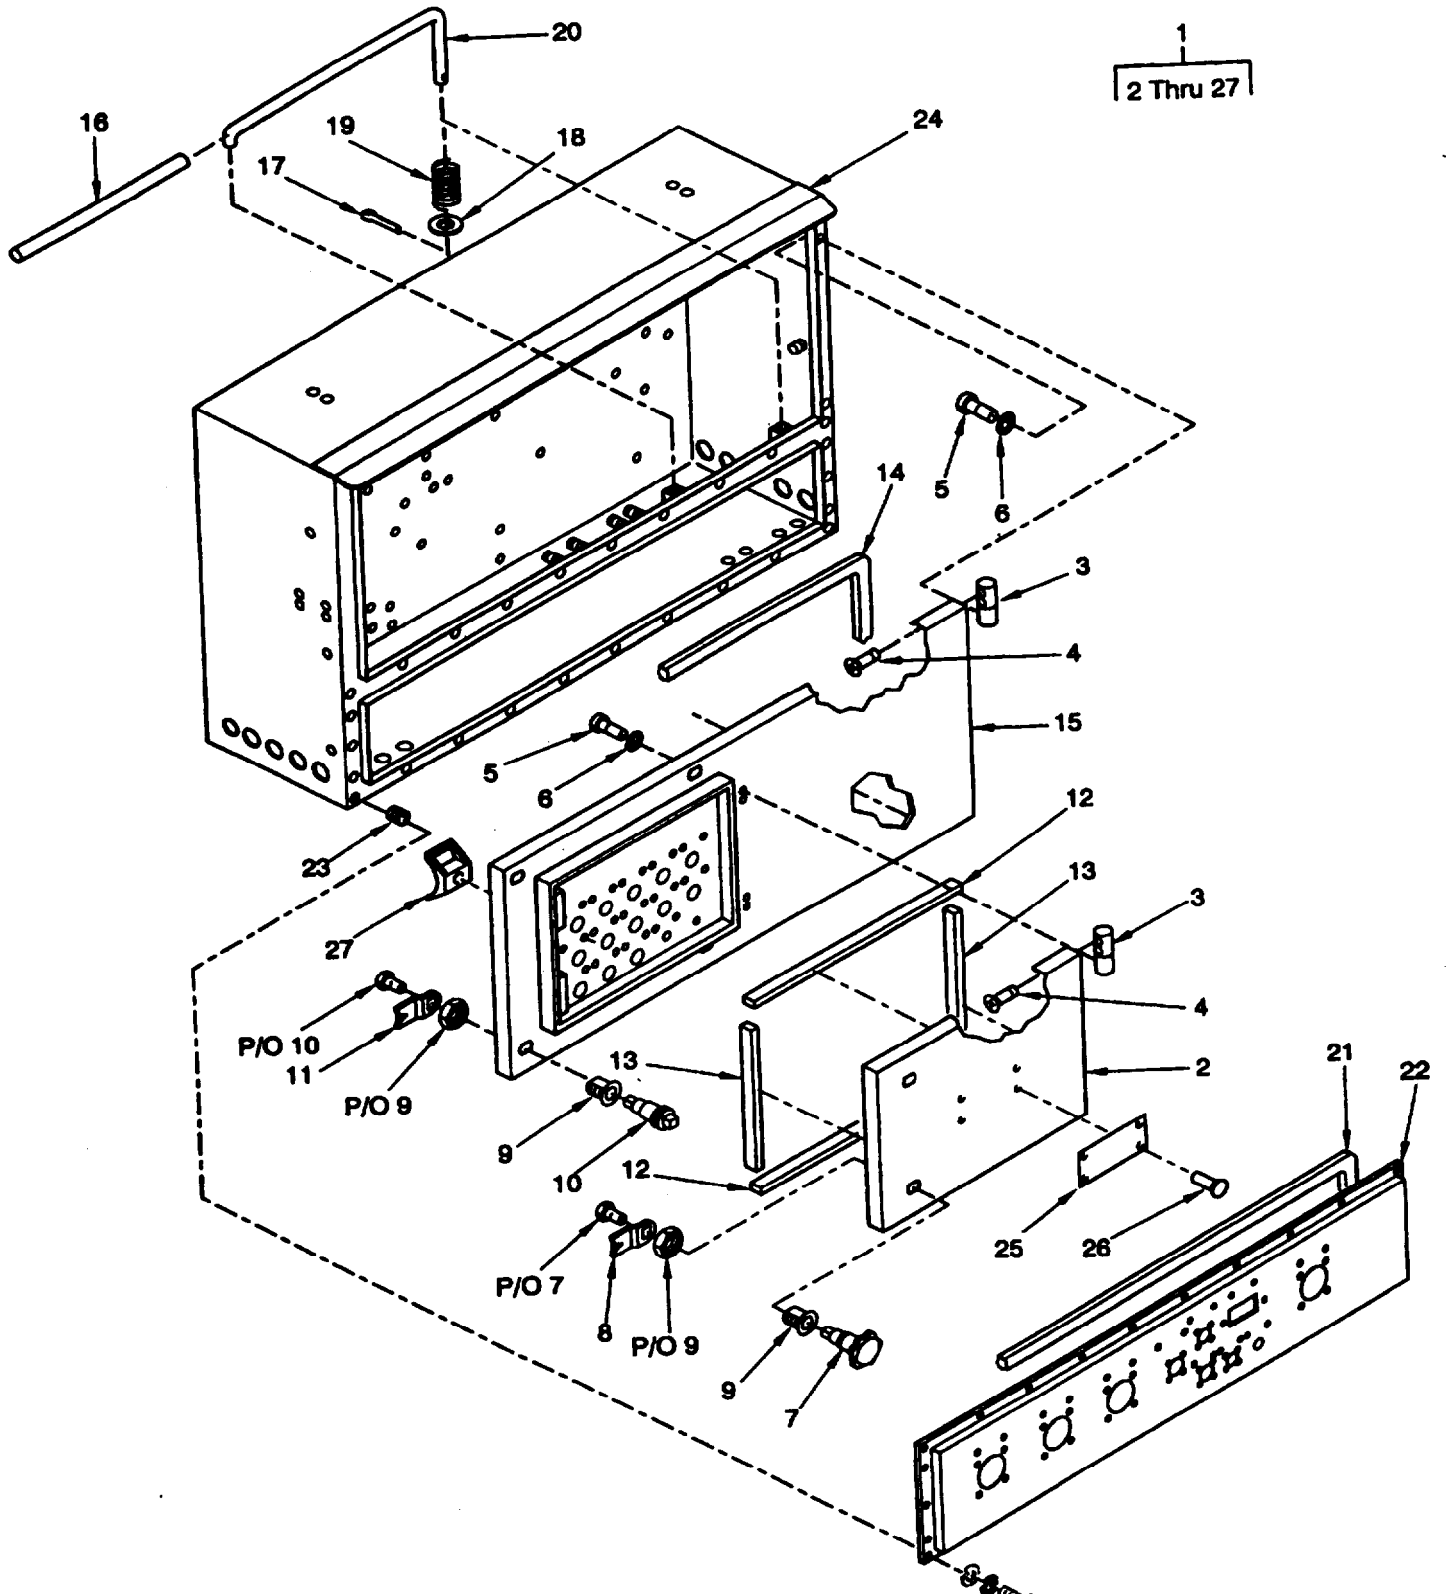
Housing Assembly, PDU - Cabinet, 150KW
